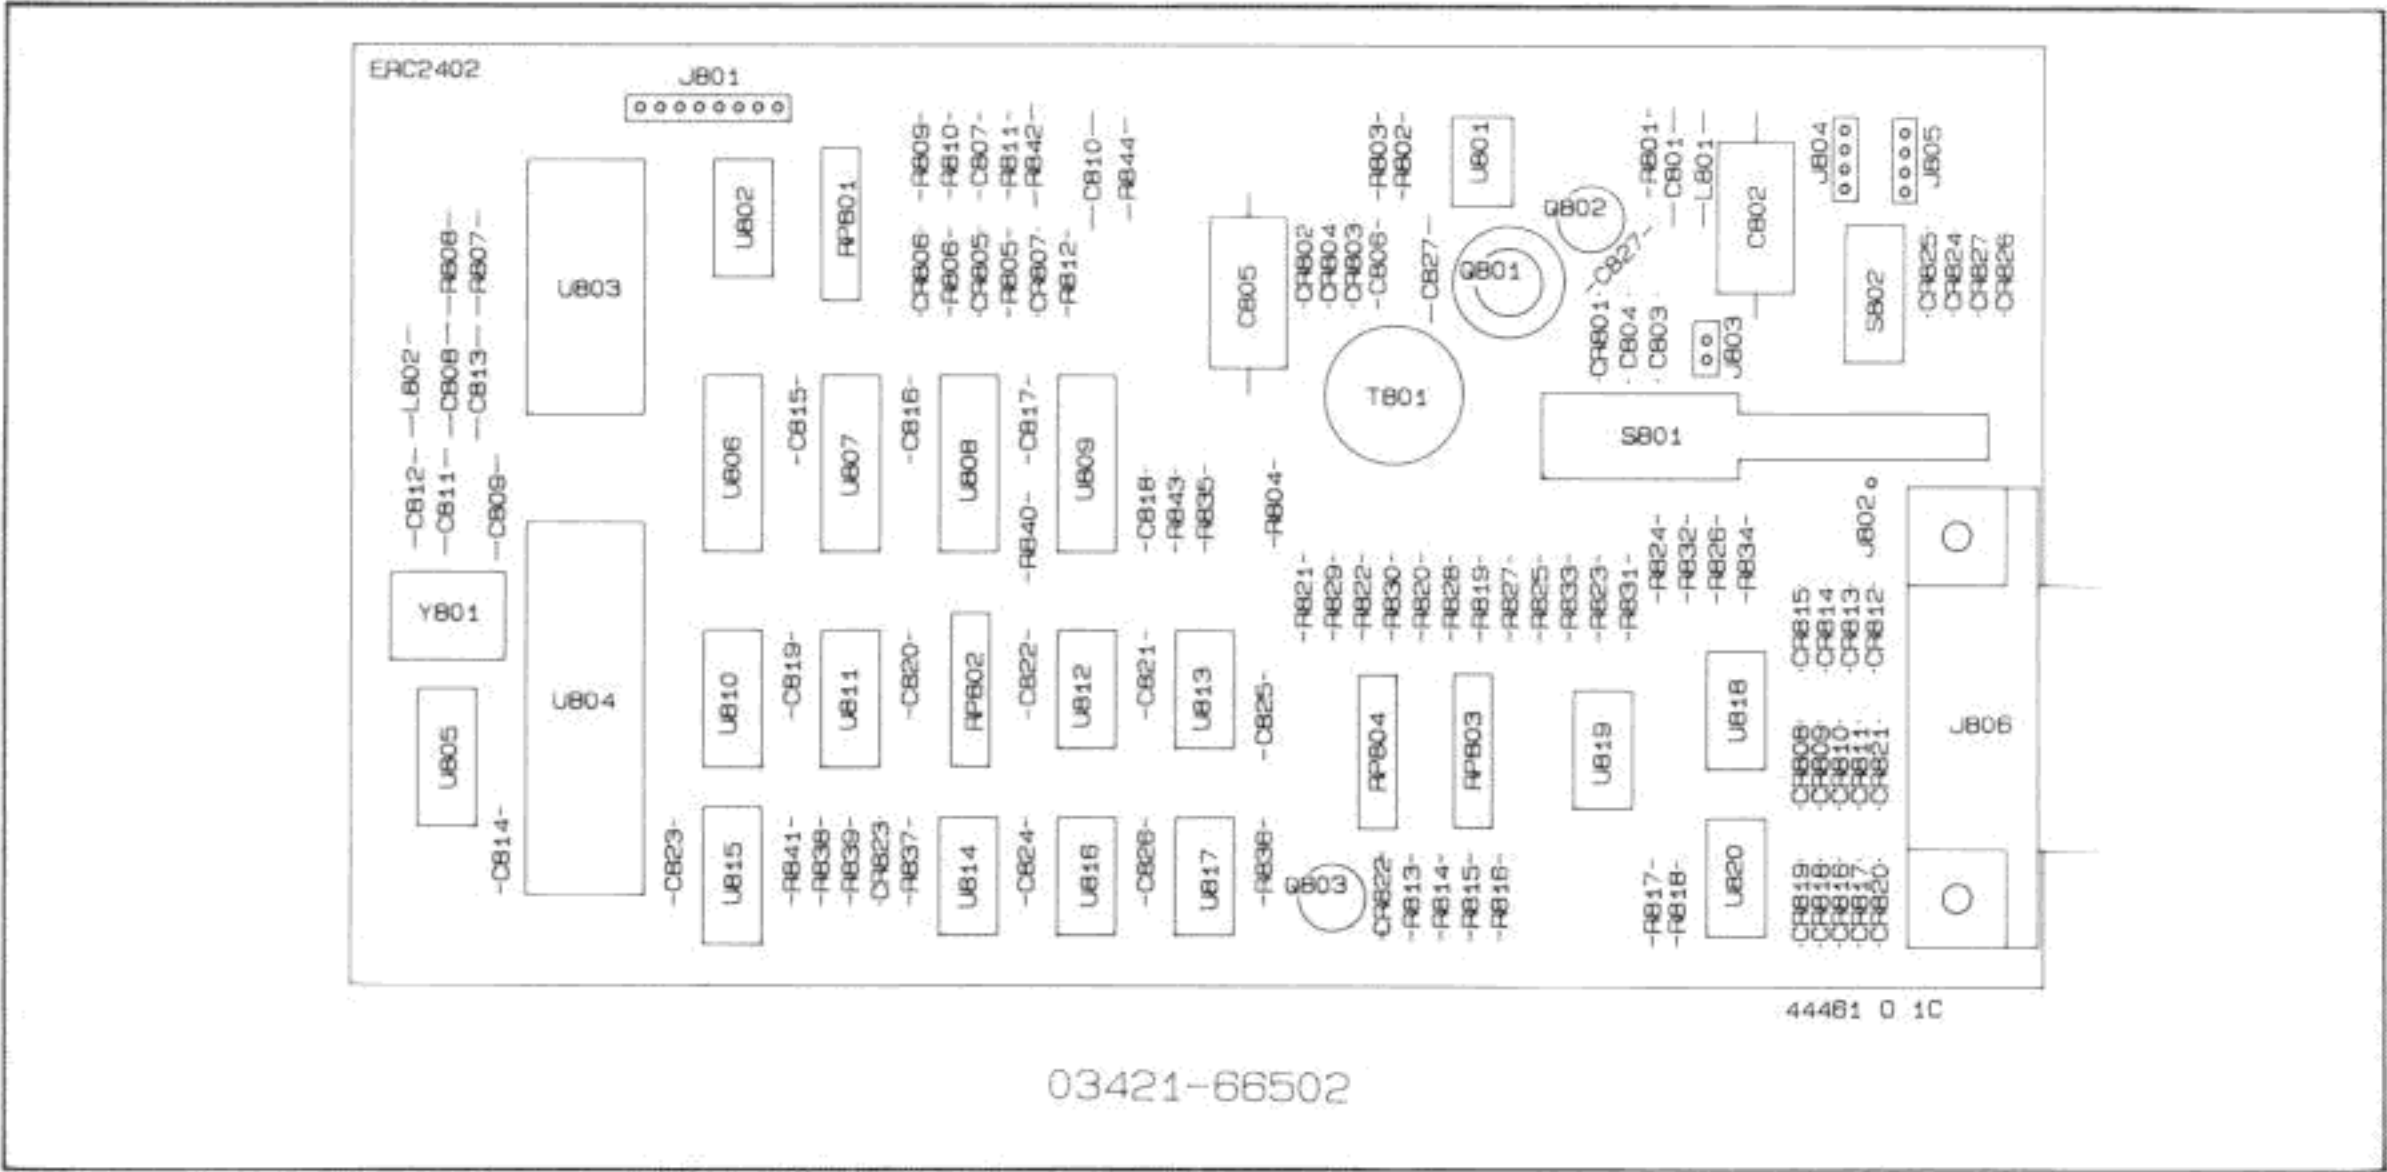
Component Locator for Early HP-IB Assemblies
